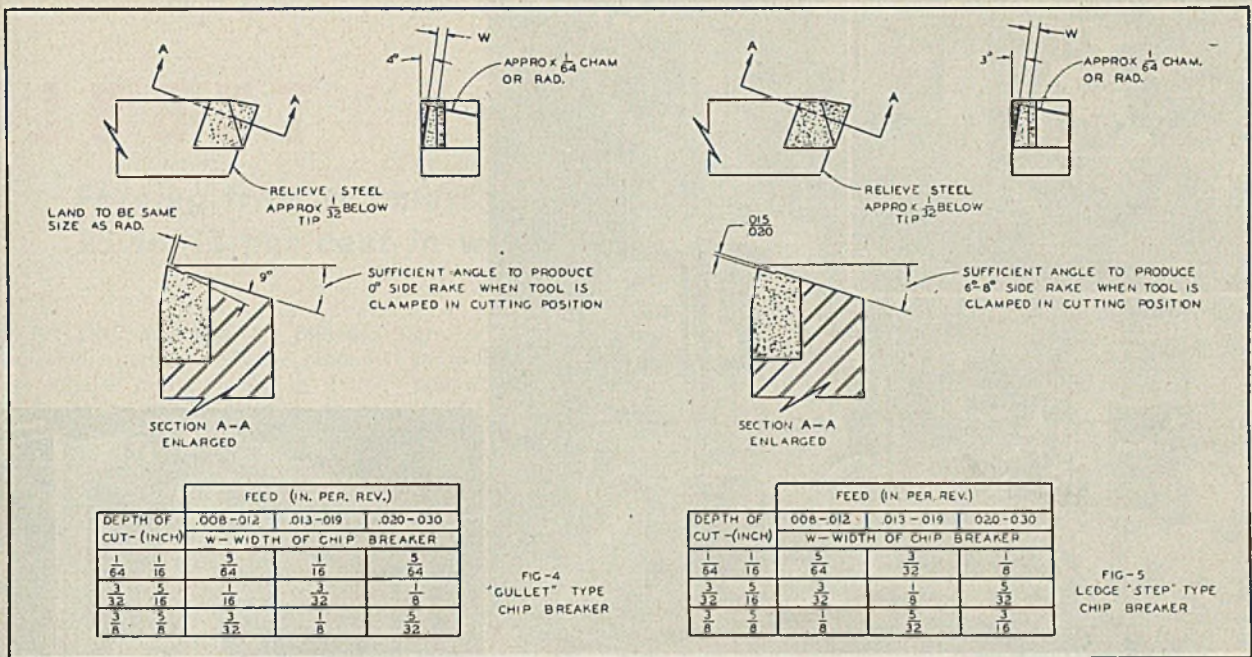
Details of the gullet type chip breaker as used on Carbonyl roller turner tools
